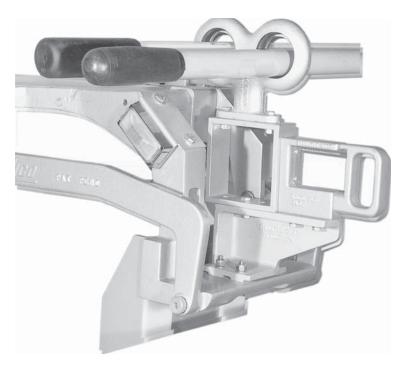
MODEL LAS-FLB ATTACHED TO PIVOT SUPPORT CASTING (3097-105-104) WITH MODEL HSS-TMC TRAY MOUNT CASTING FOR MOUNTING OF HARD SLEEVE
